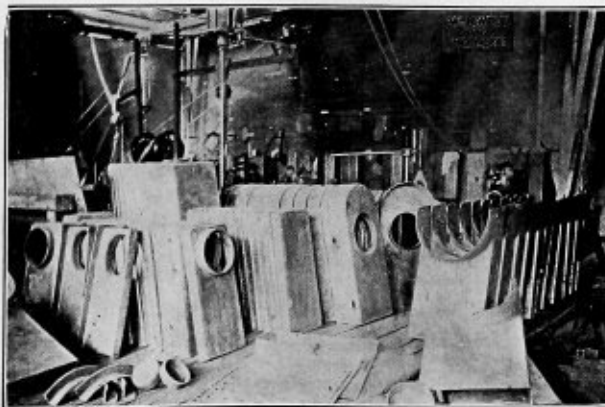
Throat and Door Sheets Flanged by Hydraulic Press
